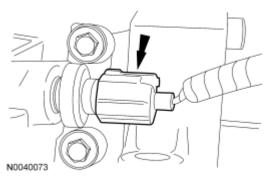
Locating Oil Pressure Sender Electrical Connector Courtesy of FORD MOTOR CO.
